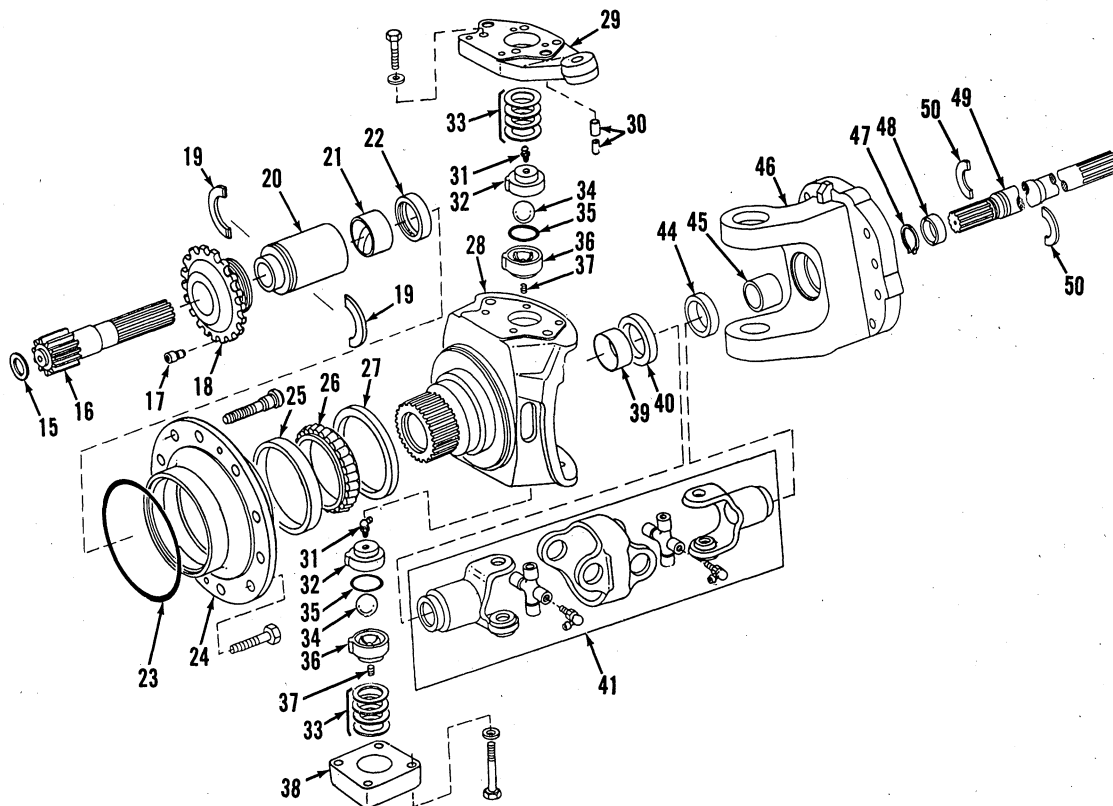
Exploded view of front-wheel drive axle knuckle-spindle assembly.
